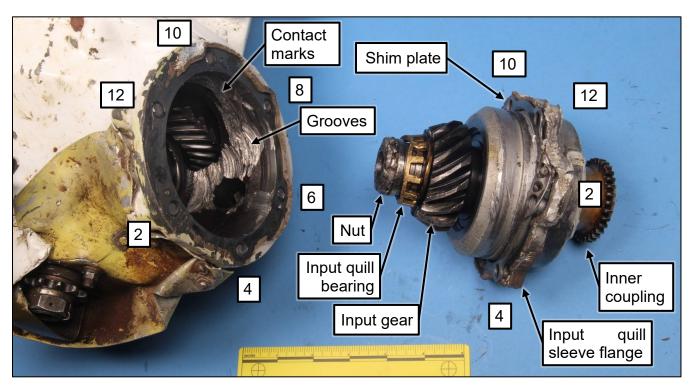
Input quill assembly and tail rotor 90° gearbox assemblies showing grooves on the interior surface of the gearbox housing and damage to the input quill bearing and adjacent nut.
